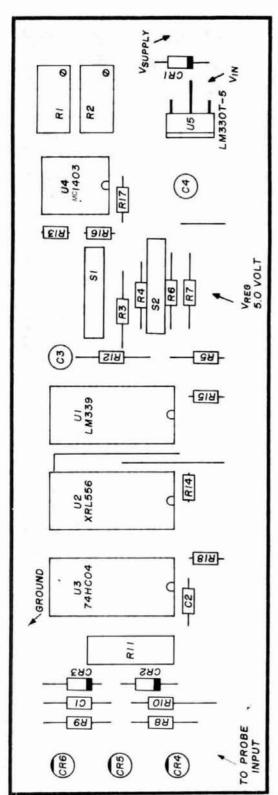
C. Component placement diagram showing pattern of 3A, 2x actual size.
